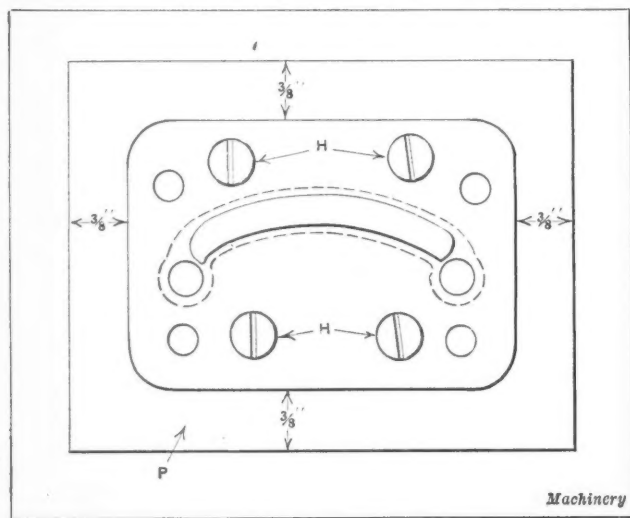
Gage Blank mounted on Plate Ready for Grinding Operation
